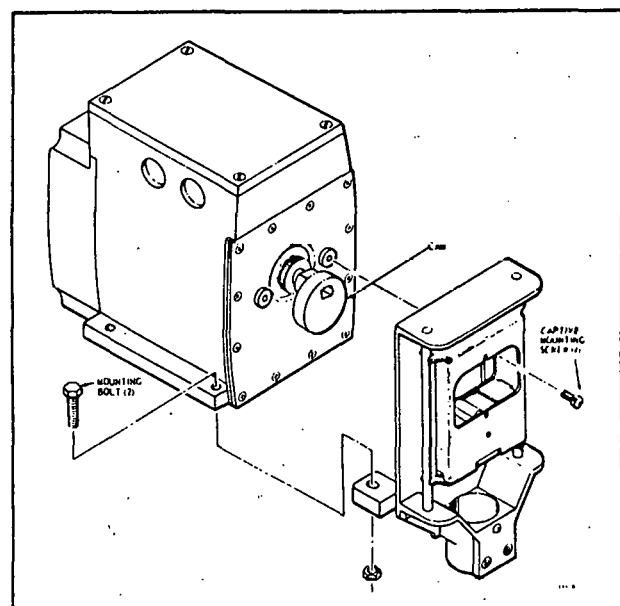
ASSEMBLY OF THE Q618 VALVE LINKAGE TO A MODUTROL MOTOR.
